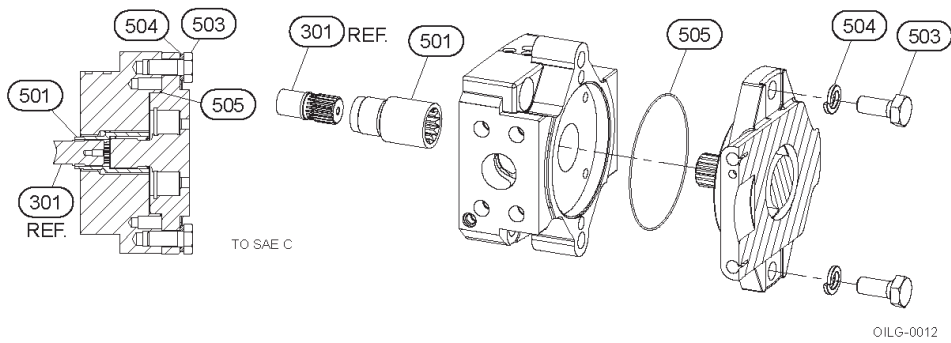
Cross Section and Exploded Parts Drawing for PVG 048, 065 and 075 (517105 sheet 1 and 2)
